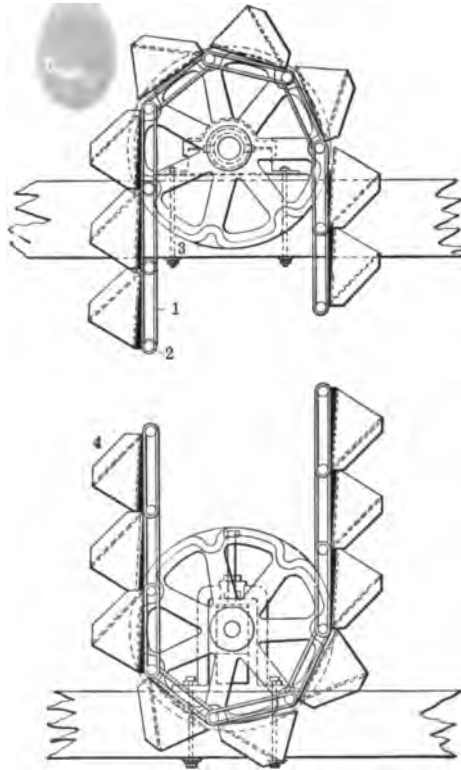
SIDE ELEVATION OF LINK AND SPINDLE ELEVATOR.
